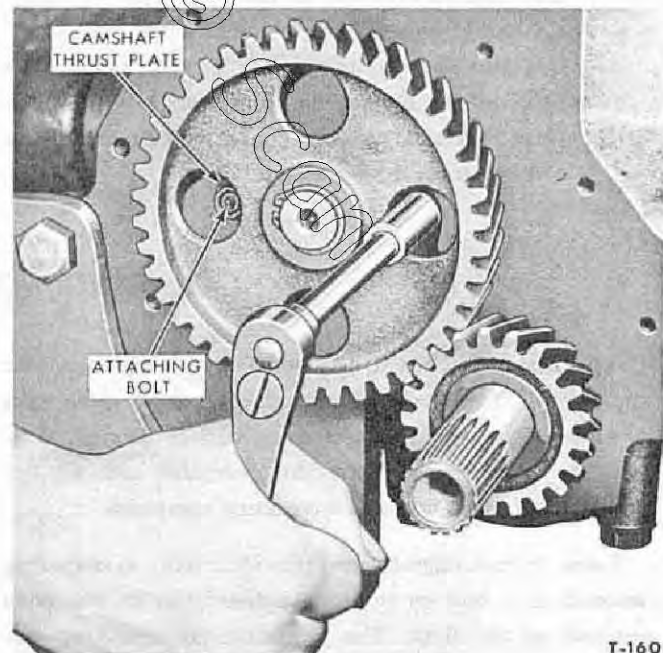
Removing Camshaft Thrust Plate Attaching Screws
